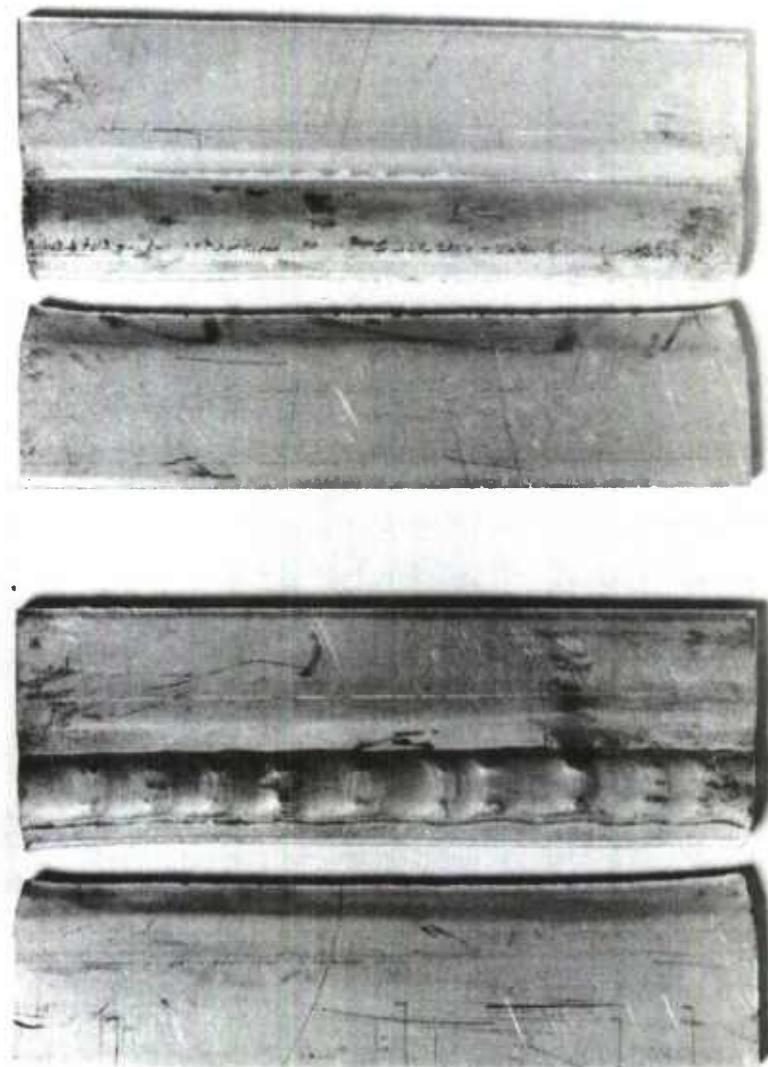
Fractured Fatigue Specimens 5052-H38 Aluminum Alloy (78° F)
